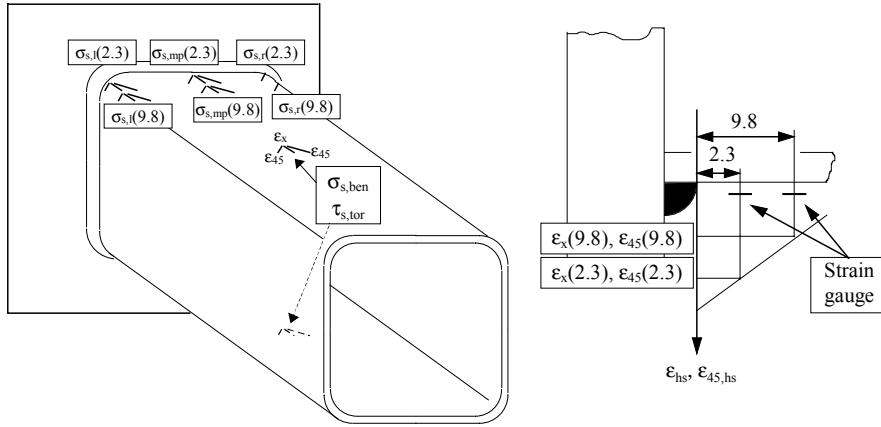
Rosette strain gauges: a) location in the calibrating component and b) distances from the weld toe.
